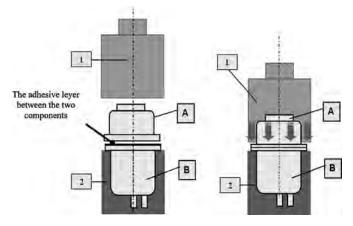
Hybrid welding scheme - adhesive with US 1 - sonotrode; 2 - B fixing device.
